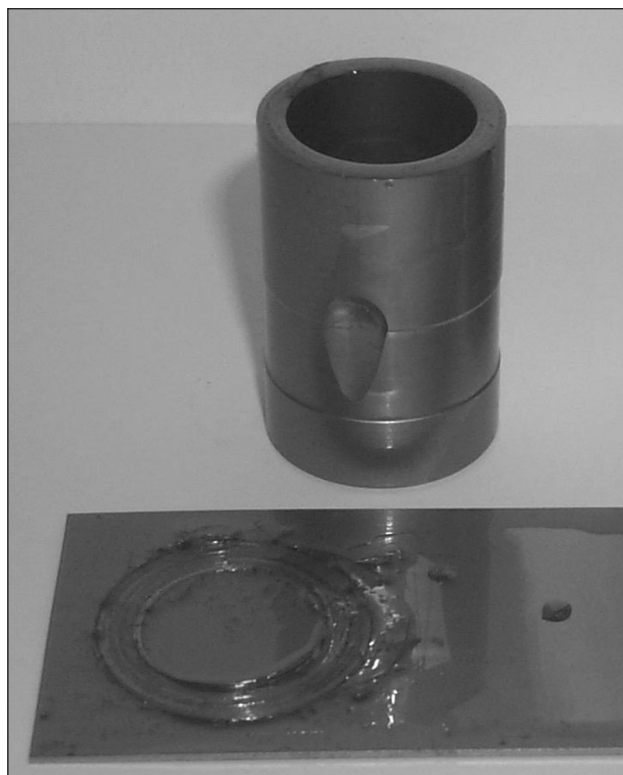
Photograph of wear tracks after time-to-failure (TTF) determination at 200 MPa: inverted annular cylinder (top), made of tool steel, and workpiece (bottom), made of low carbon steel. Wear scar is visible only on the workpiece due to its much lower hardness and poorer strength
